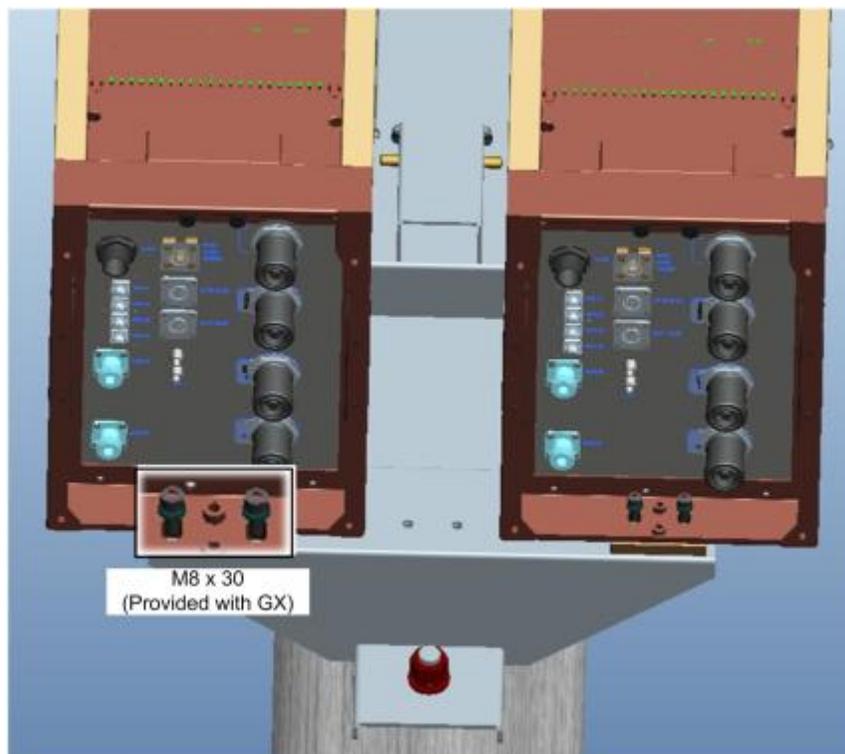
Securing GX Bottom to Bracket with M8 Screws
